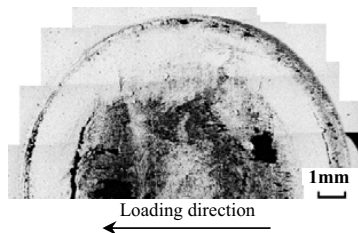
BEI of tensile fracture surface observed on the lower steel sheet of dissimilar weld. The loading direction is horizontal
